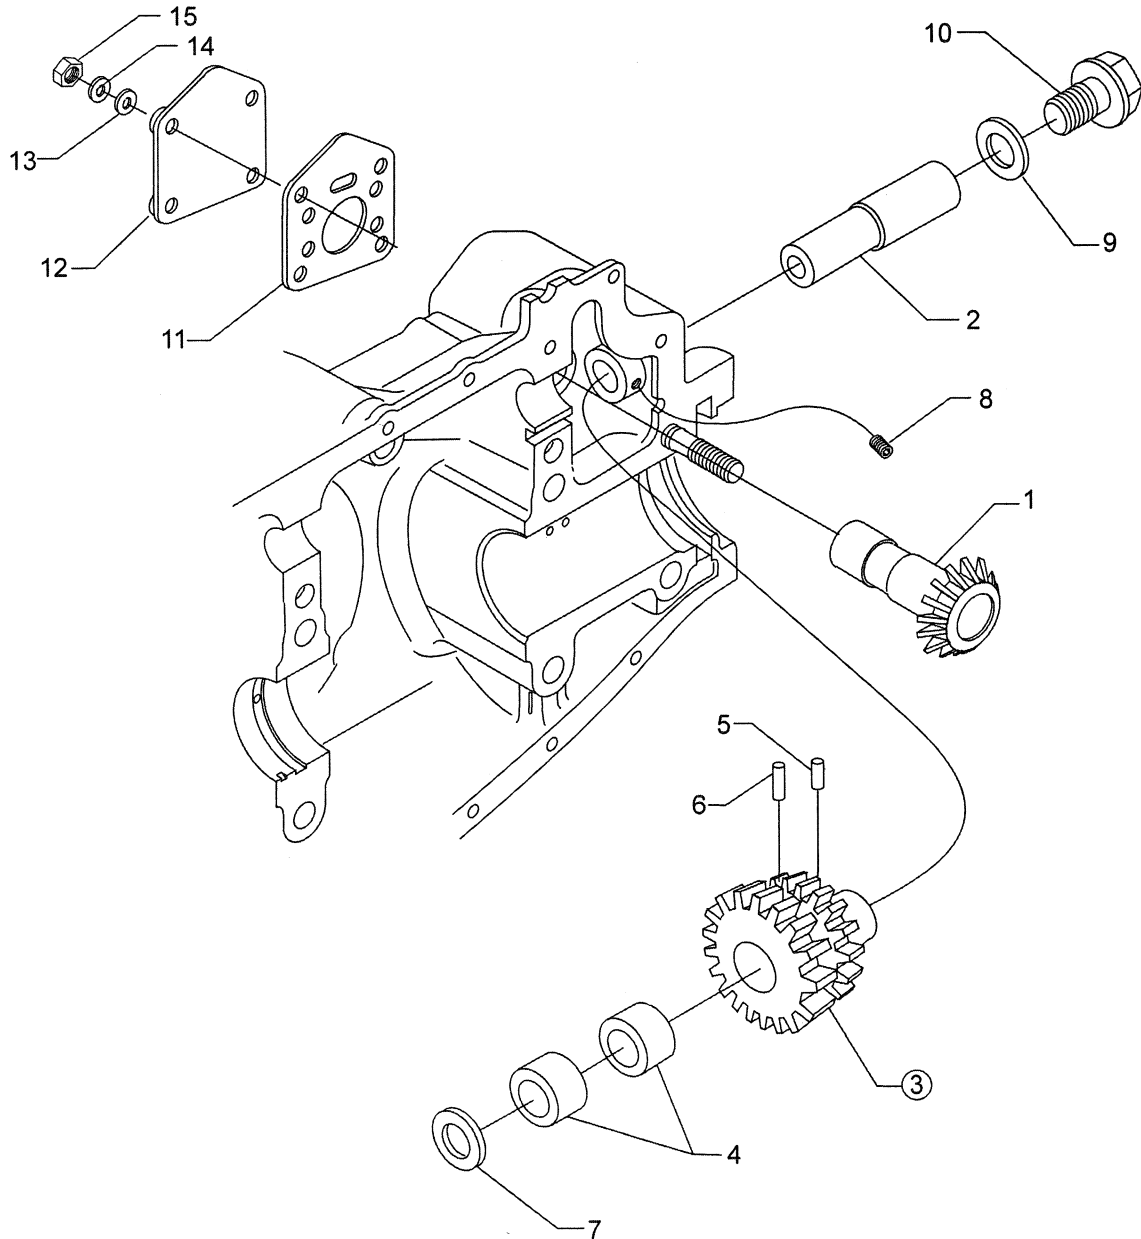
PROPELLER GOVERNOR DRIVE ASSEMBLY
